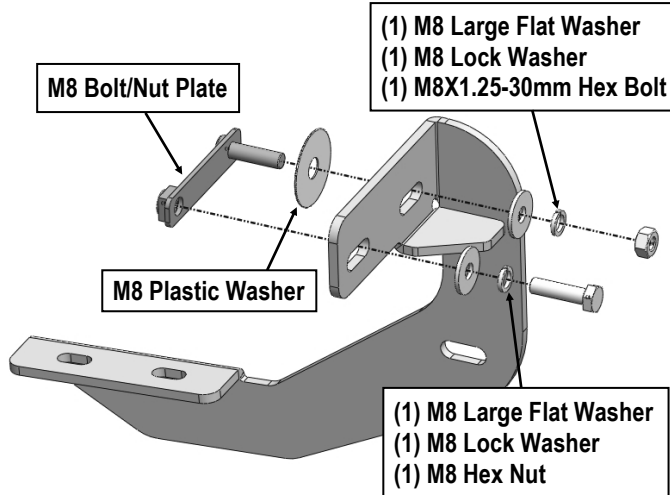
Thread Plastic Washer onto the welded bolt to hold Bolt Plate in position
